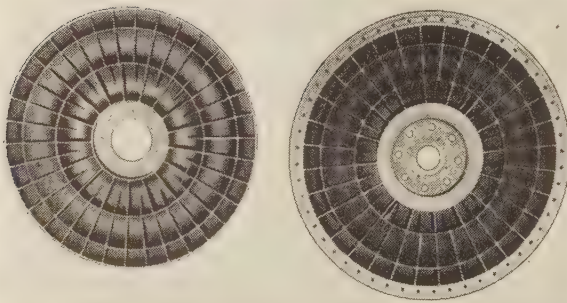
IMPELLER AND RUNNER OF A HYDRAULIC COUPLING
